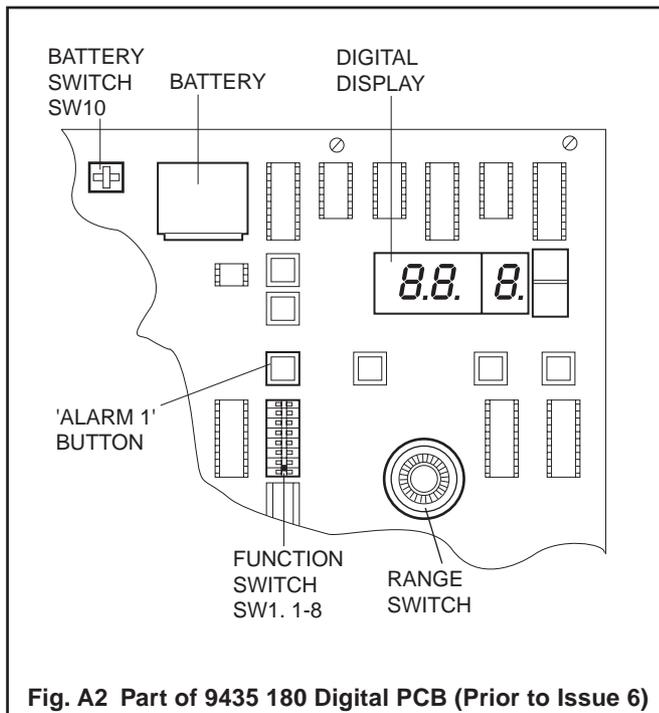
Part of 9435 180 Digital PCB (Prior to Issue 6)
